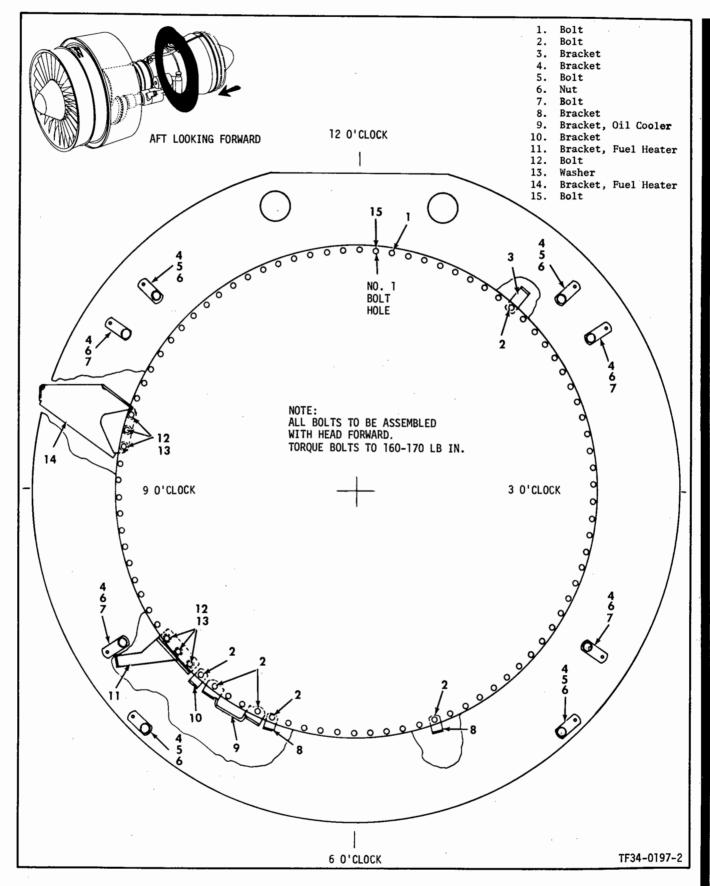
Bolting Diagram - Combustion Chamber-High-Pressure Turbine Casing
